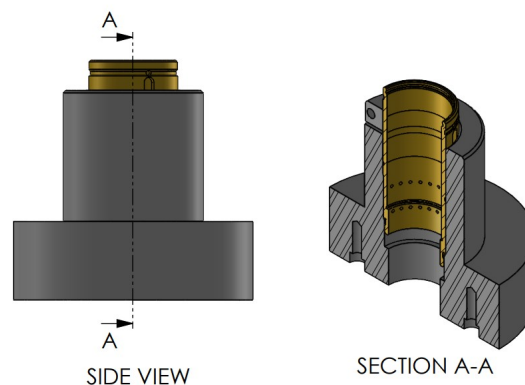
Side and sectional view of the barrel mounted in the fixture.
